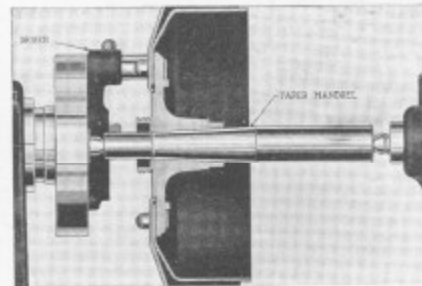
Set up of a Rear Wheel Mounted Between Lathe Centers on a Taper Mandrel.
